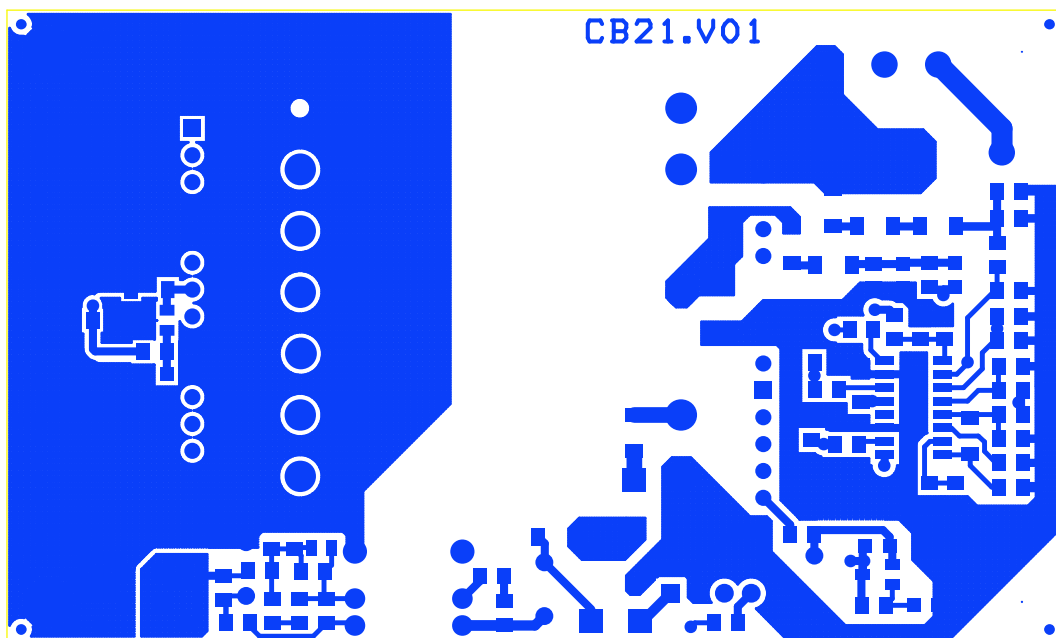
EVLMG1-250WLLC motherboard PCB layout – top side
